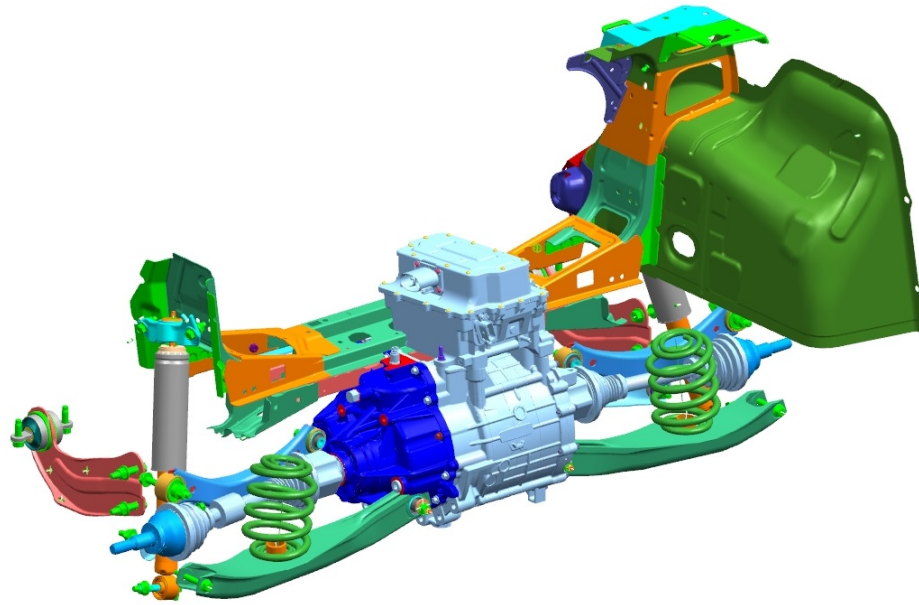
Electric motor placement within stock Malibu suspension - rear isometric view.
